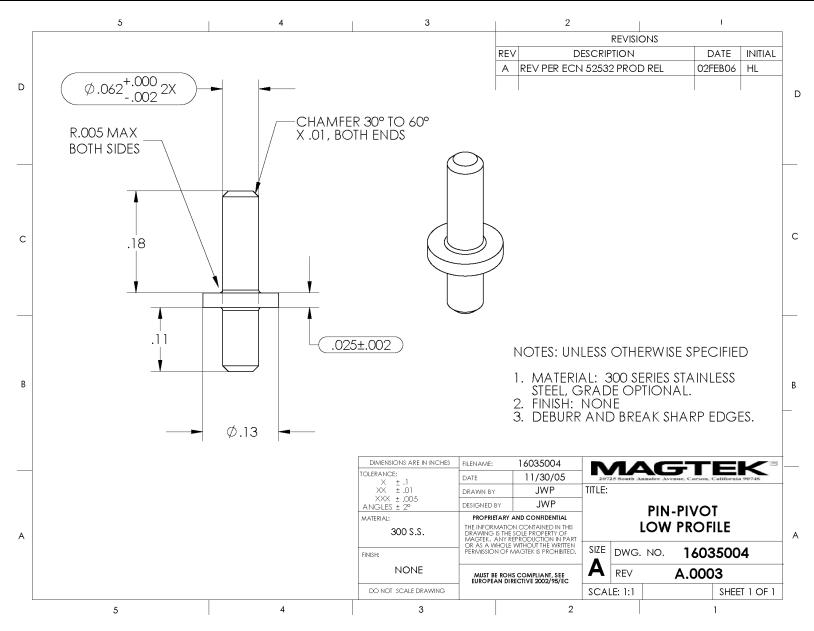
Pin – Pivot (Used for Beam Style Head Mounting)
